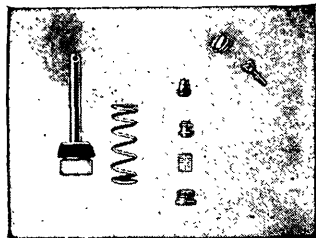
Assemble parts for pump circuit. Replace both spring and leather if leather shows wear or damage. Test check valves by blowing free operation
